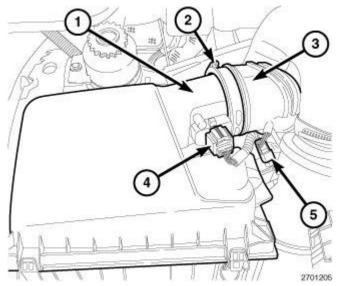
IDENTIFYING AIR CLEANER HOUSING & CLIPS Courtesy of CHRYSLER LLC
